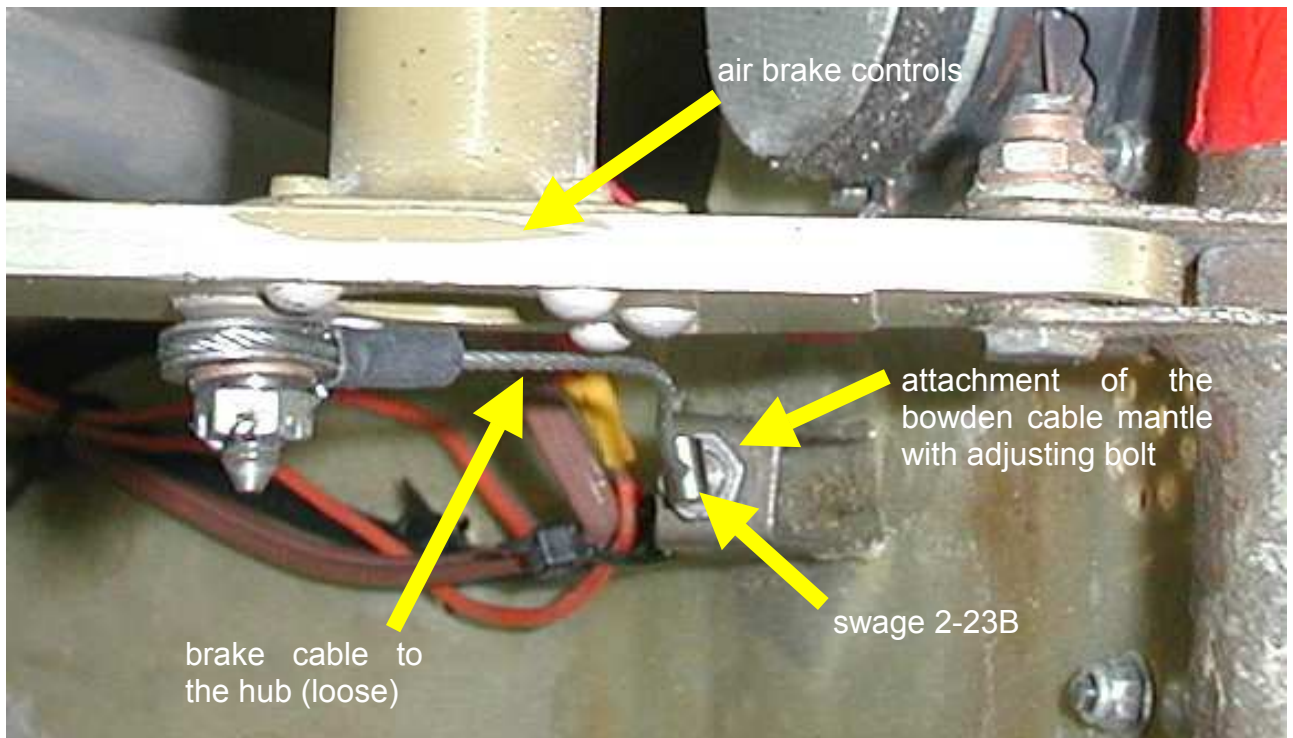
Brake cable behind the back bulkhead (air brakes retracted)
